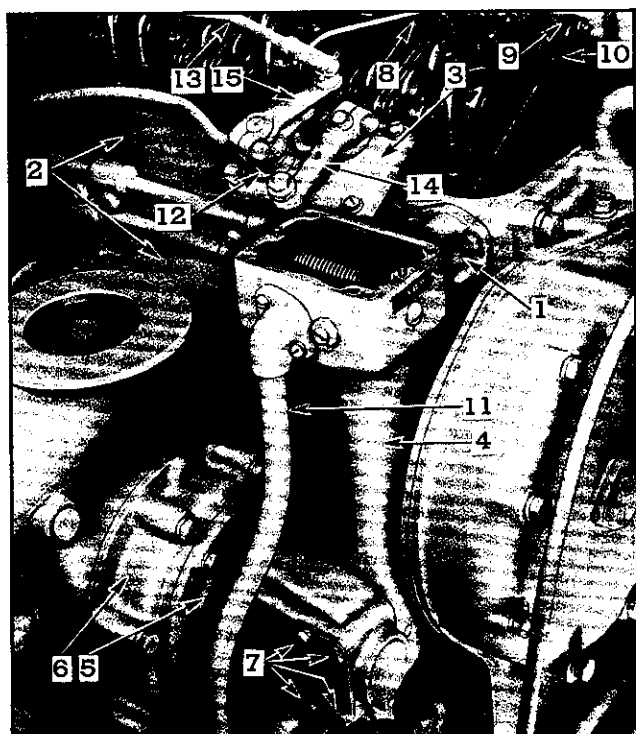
Top View of Governor Control Mechanism. (LA, RA, LB, and RB Engines)
